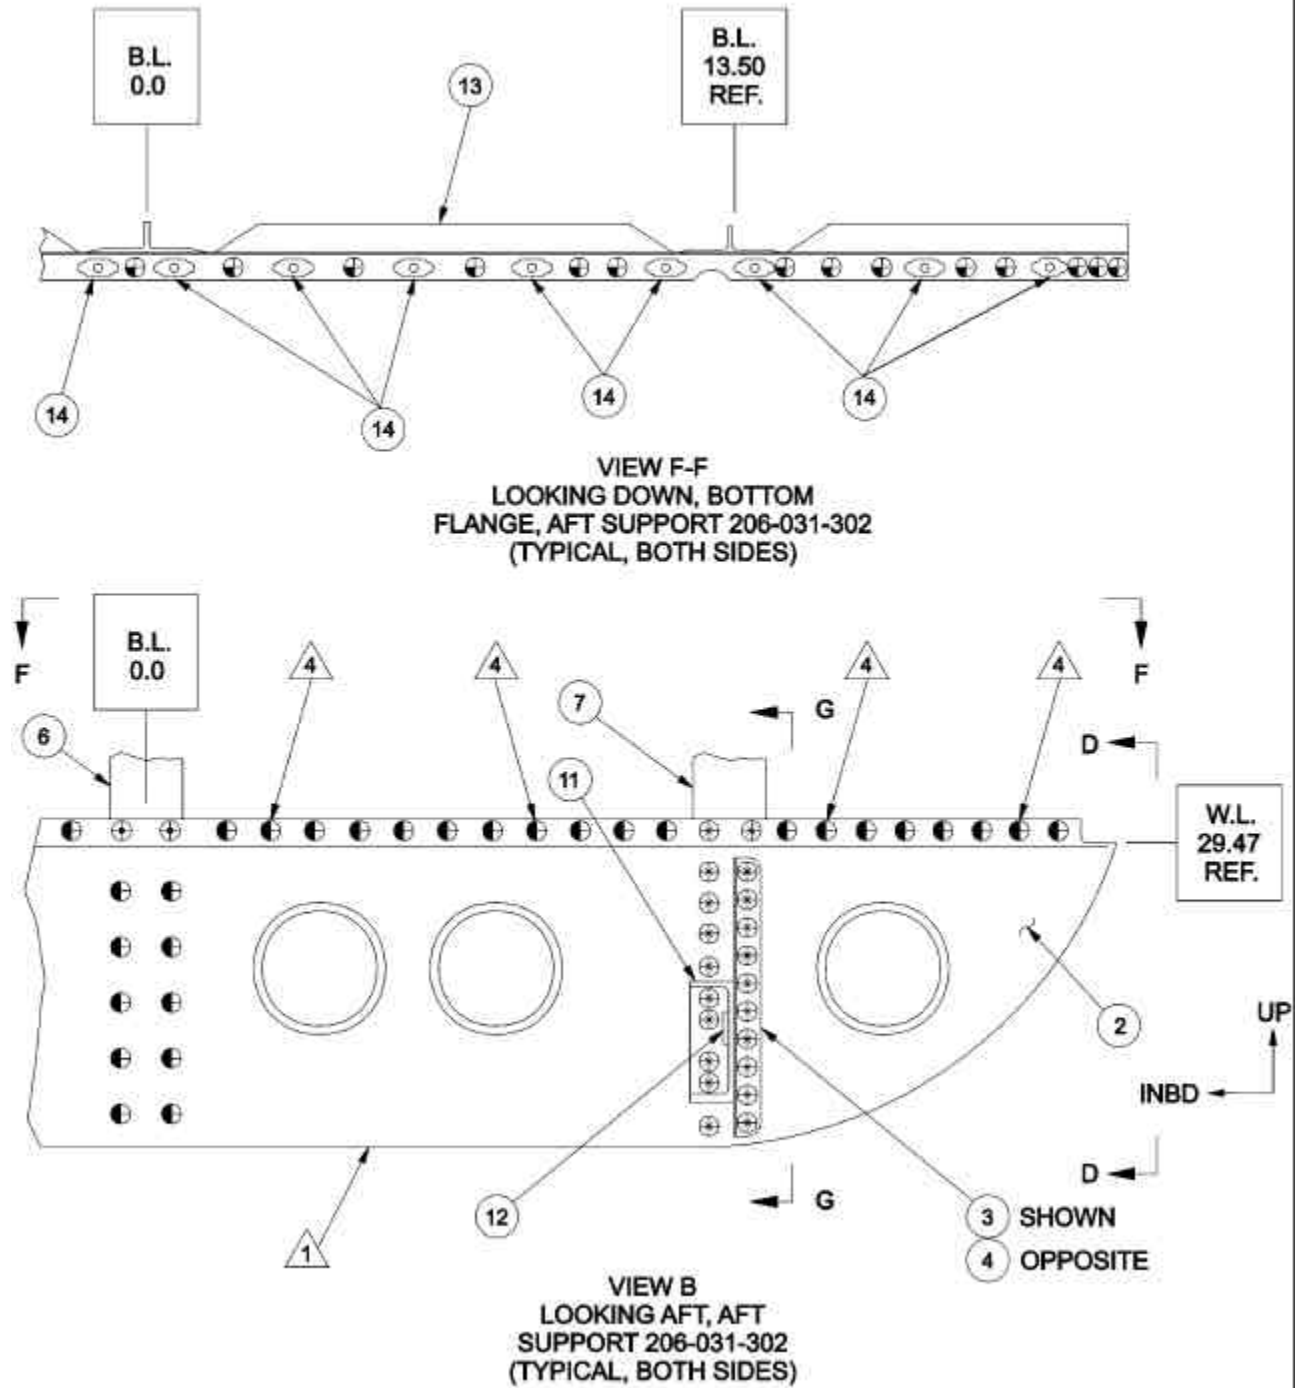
Support assembly 206-031-301 and 206-031-302, installation of (Sheet 2)
